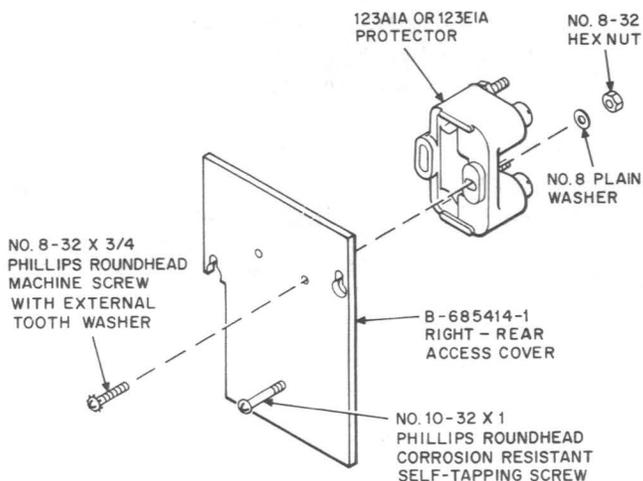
Assembly of 123A1A or 123E1A Protector on Right-Rear Access Cover
